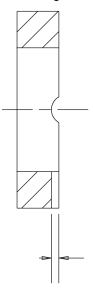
0.020 in. (0.051 cm) minimum groove height
